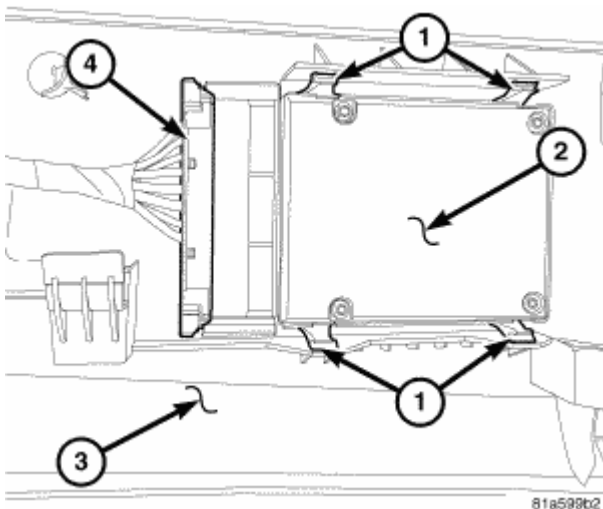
Identifying Mounting Tabs, Power Seat Switch, Seat Cushion Side Shield & Power Seat Switch Electrical Connector
